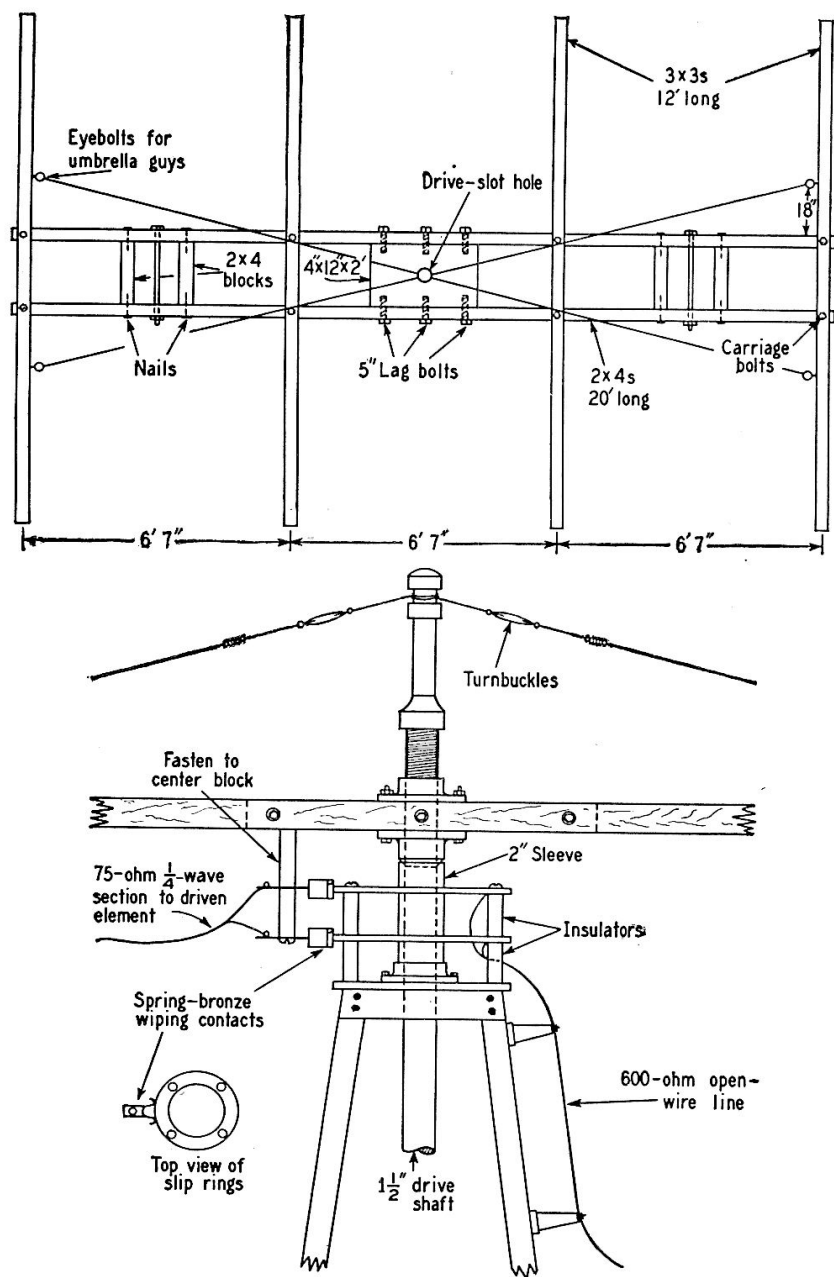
Details of the wooden boom, its method of support and the construction of the slip rings.
